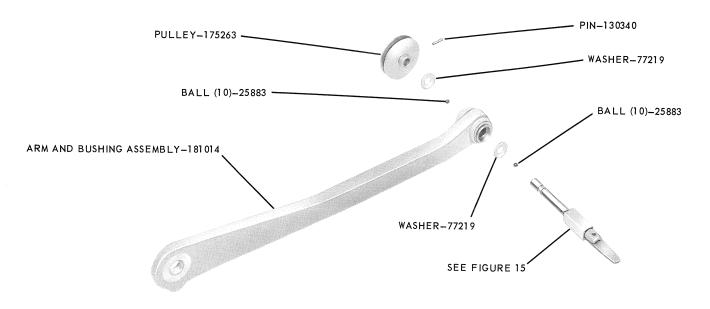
SUPPLY ARM ASSEMBLY-181013
